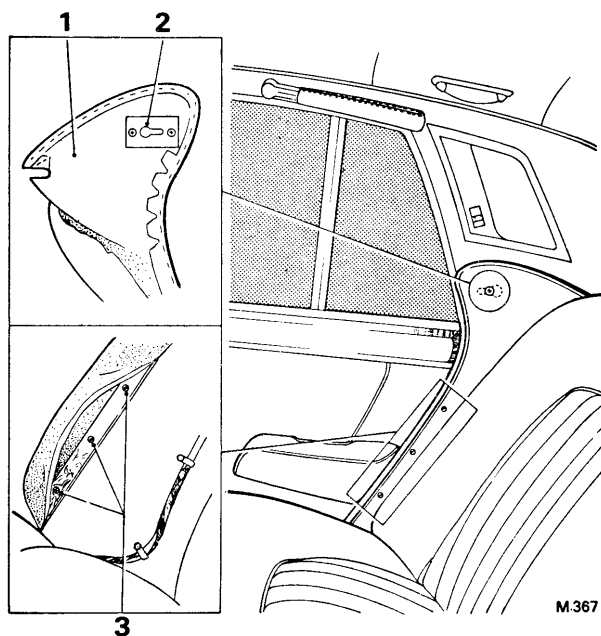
POSITION OF THE REAR CHEEK PAD SECURING SCREWS (4-Door Saloon and Long Wheelbase Non-division Cars)
